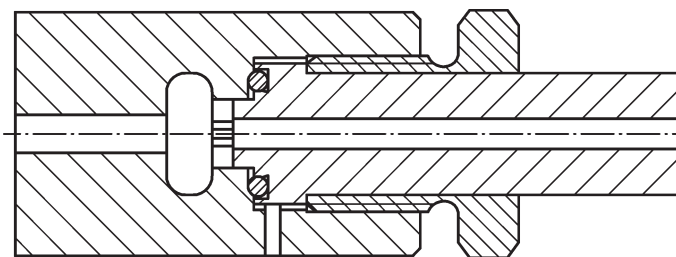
500 bar gas withdrawal connection — Assembly drawing
